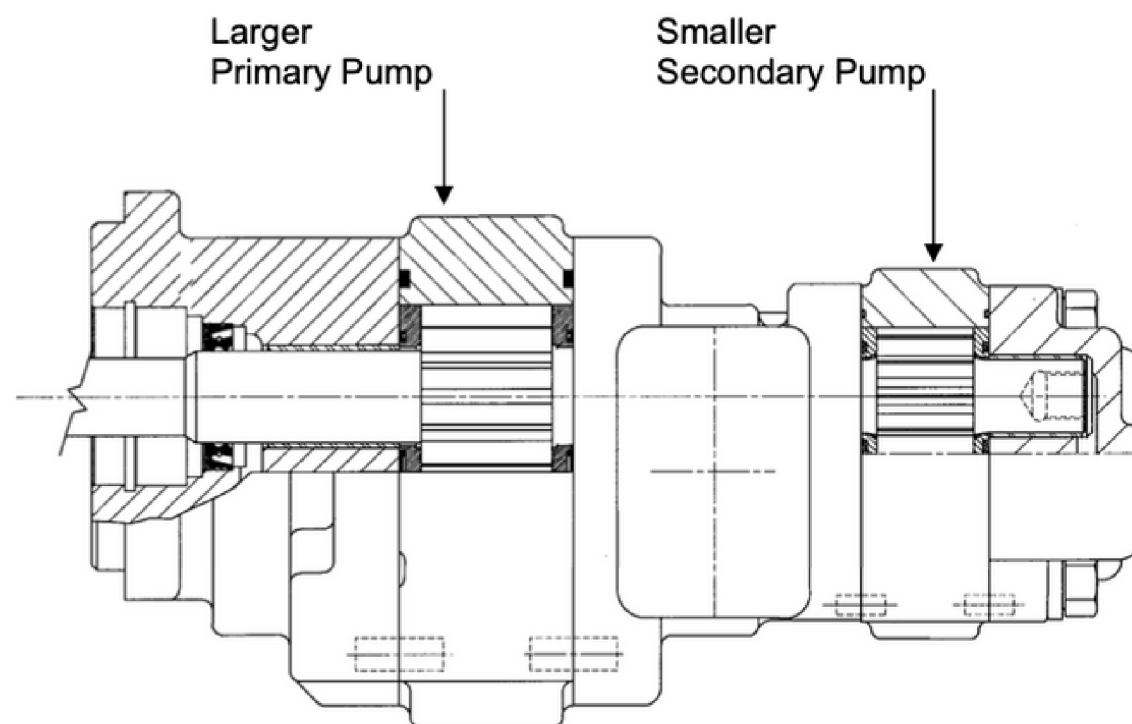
Piggy – back arrangement with gear pumps of different sizes
